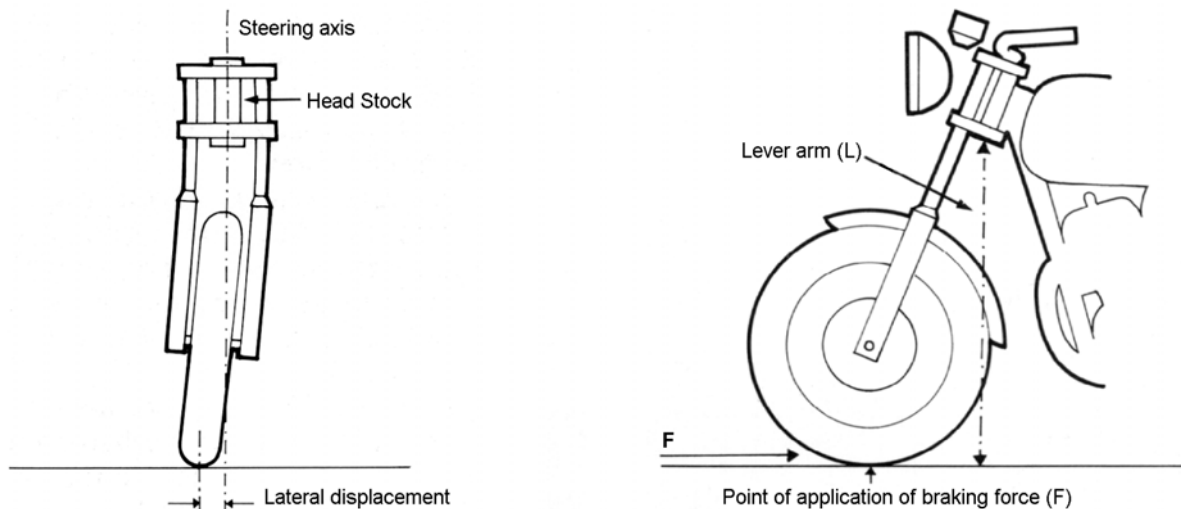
With such a large lever arm these types of deflection are present to some degree in all head stock mounted forks.
